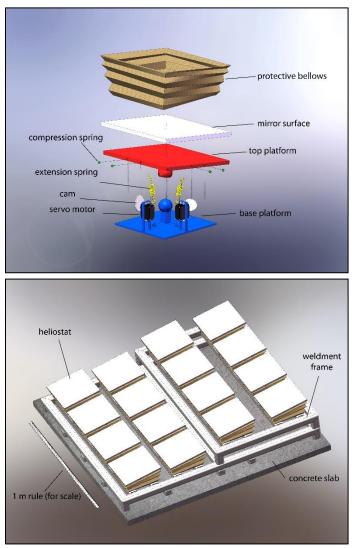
Top: Exploded view of the design concept. Bottom: 1 m^2 module with array of heliostats mounted. Major components are made from lightweight, injection molded plastic parts and off-the- shelf parts.
